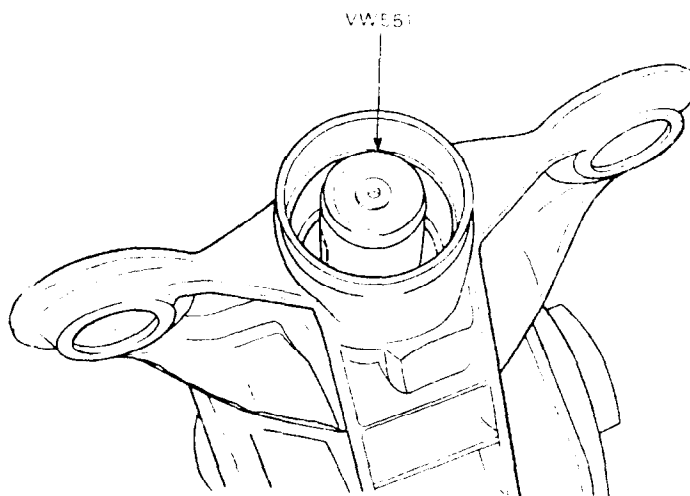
Installation of Carrier Bearing Race in Differential Housing
